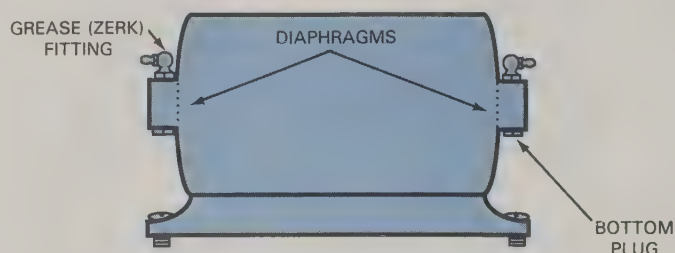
Grease fittings are used to force lubricant under pressure into a bearing. Bottom plug must be removed when adding grease to prevent rupturing the diaphragm and allowing grease to leak out of bearing.
